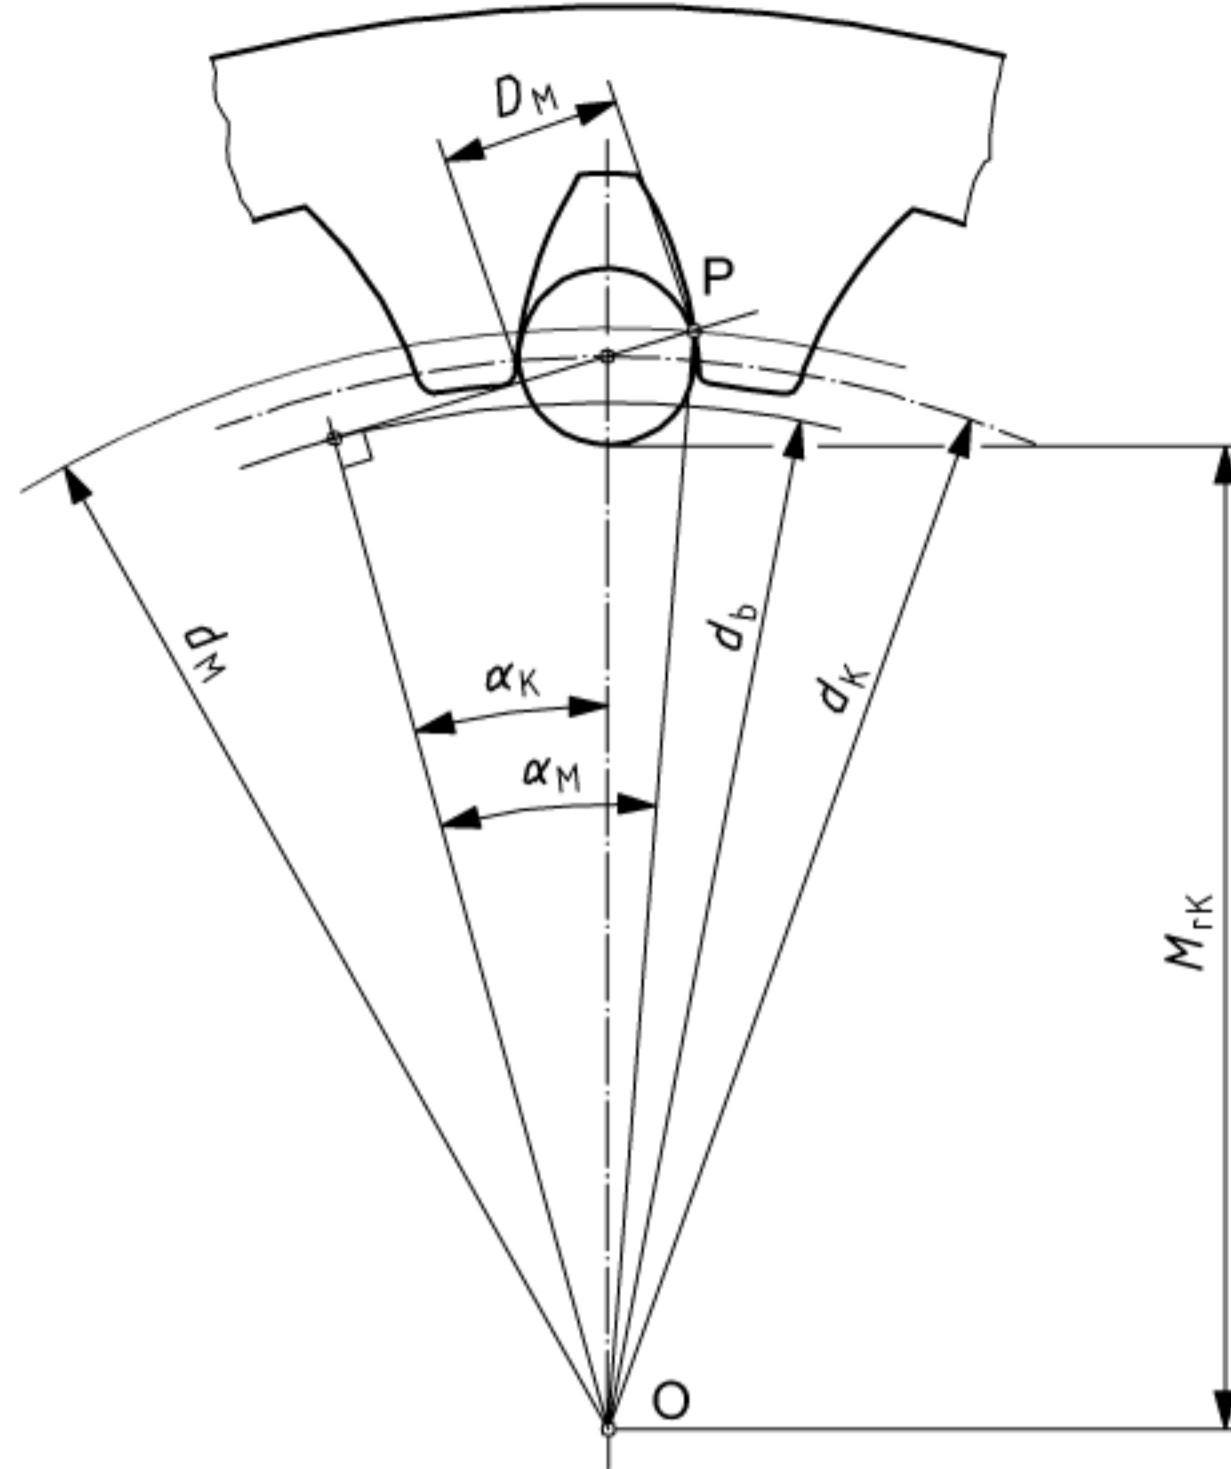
Radial single-ball dimension M_{rK} in transverse section of internal spur gear
